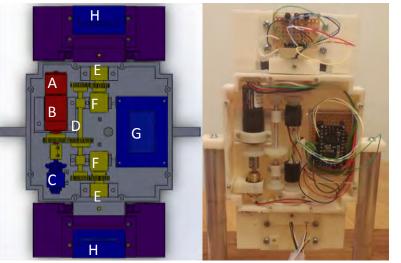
CAD Assembly (Left) and Assembled Prototype (Right)
